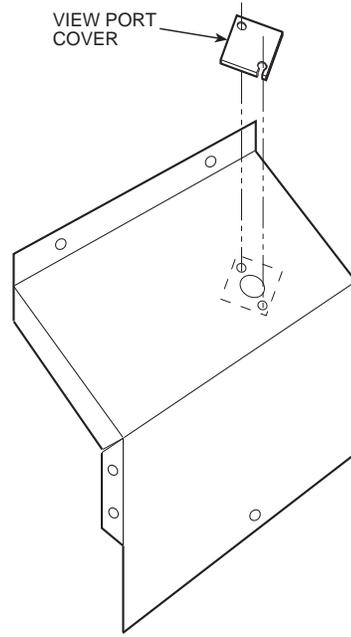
Inlet Hood View Port Cover Installation (055-105 Units Only)
